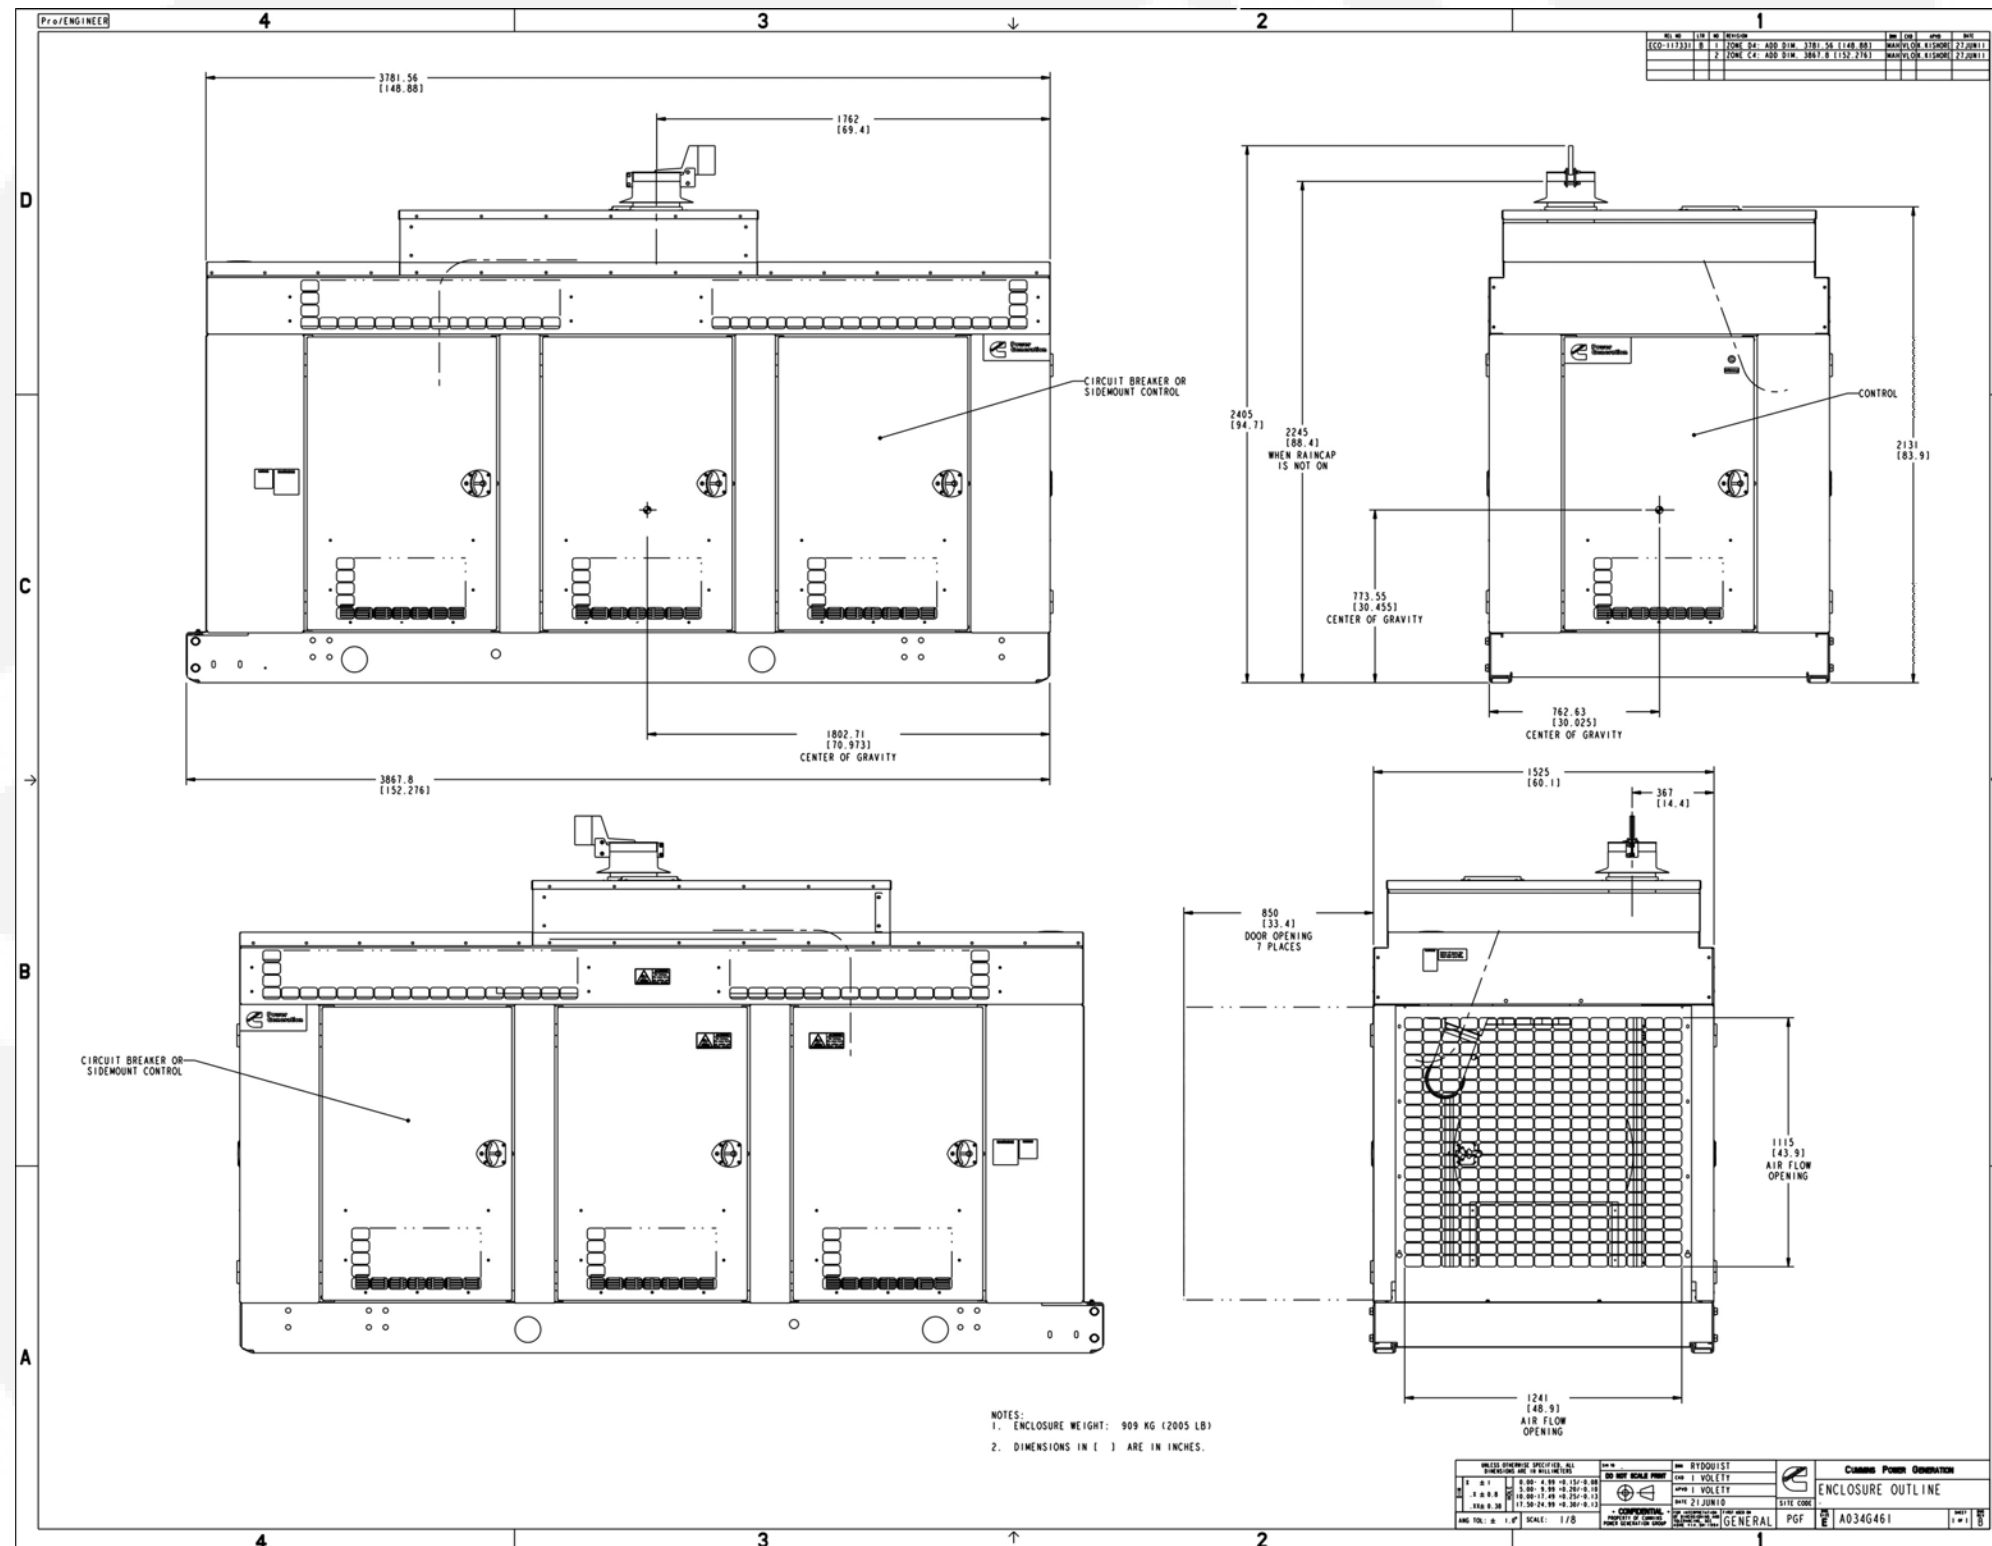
ENCLOSURE OUTLINE DRAWING (SHEET 1 OF 1)
